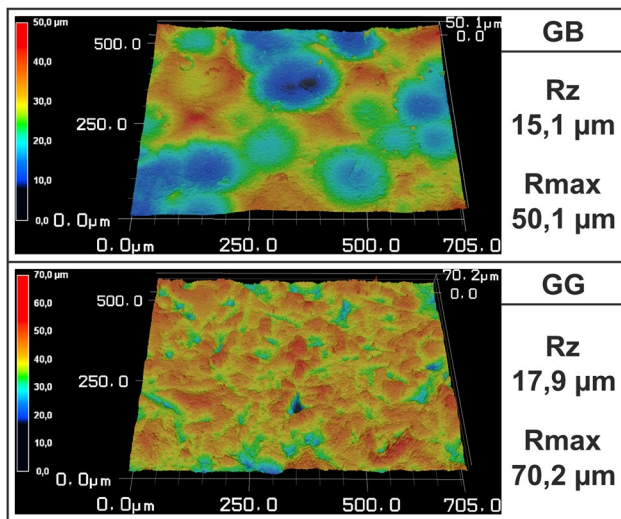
Topography of patterned electrode working faces GB and GG after ten weld cycles (CLSM)
